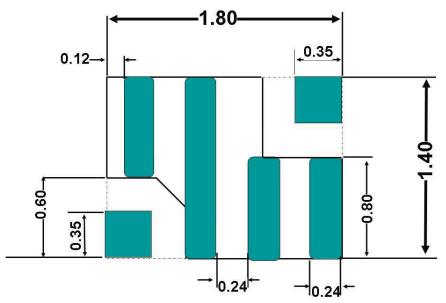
ACPF-7005 Superposed on PCB Layout (top view)
